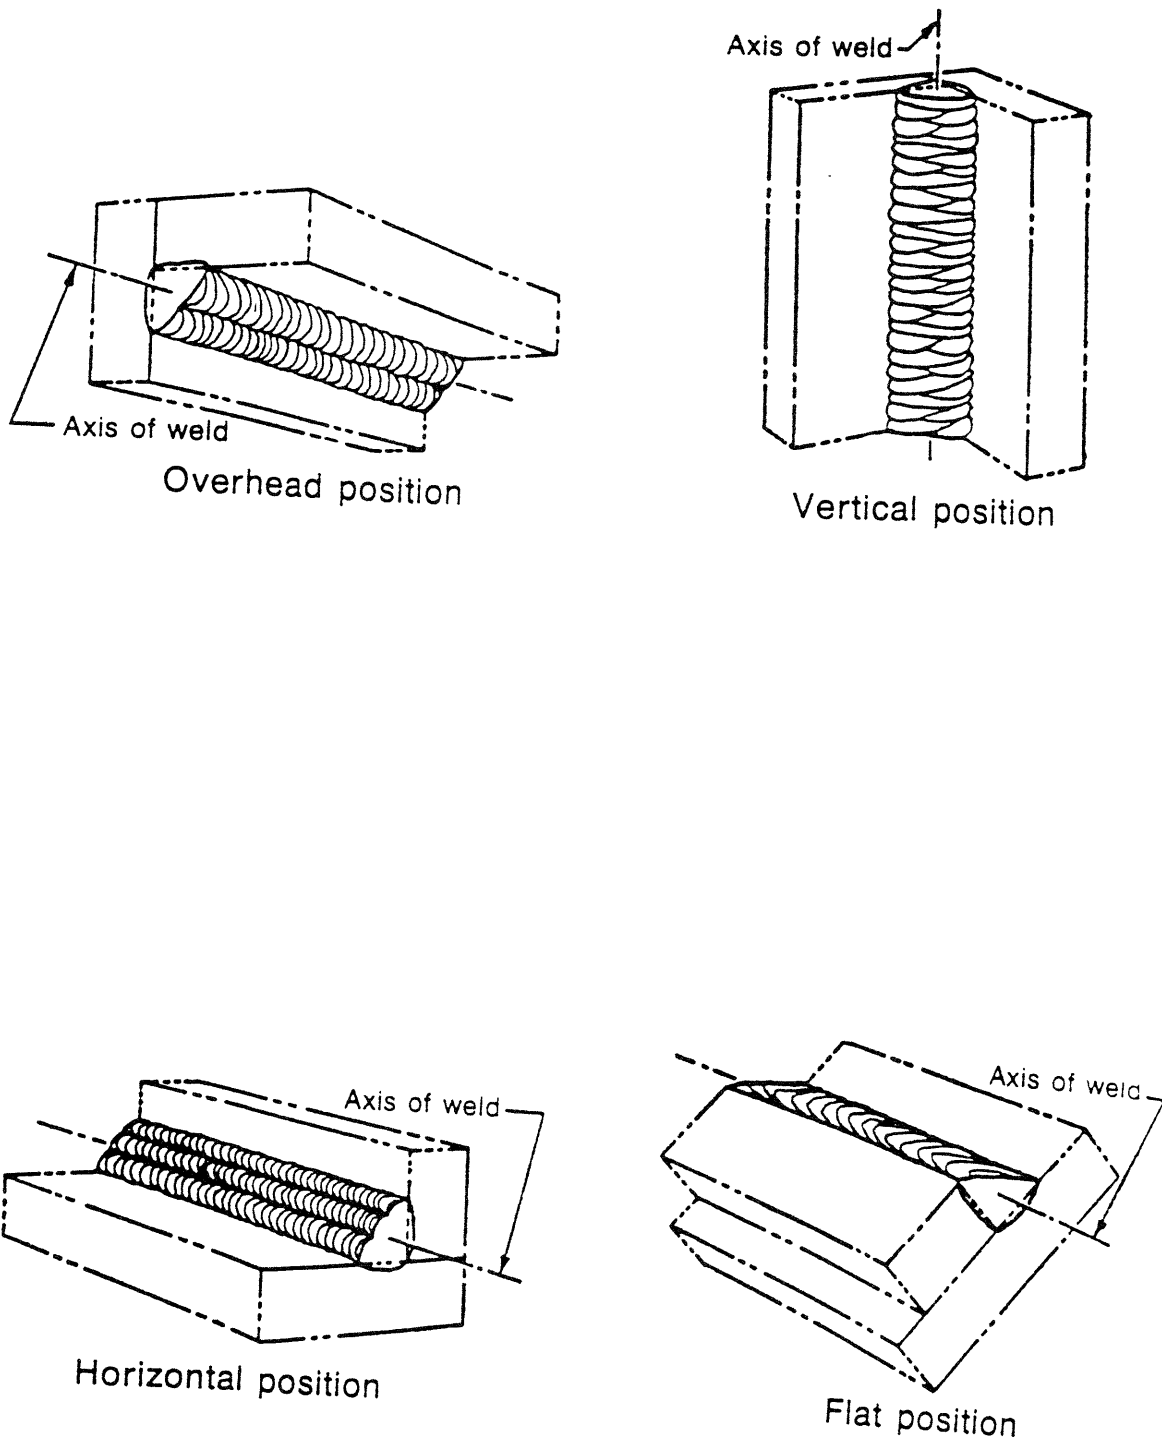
Welding Positions for Fillet Welds
